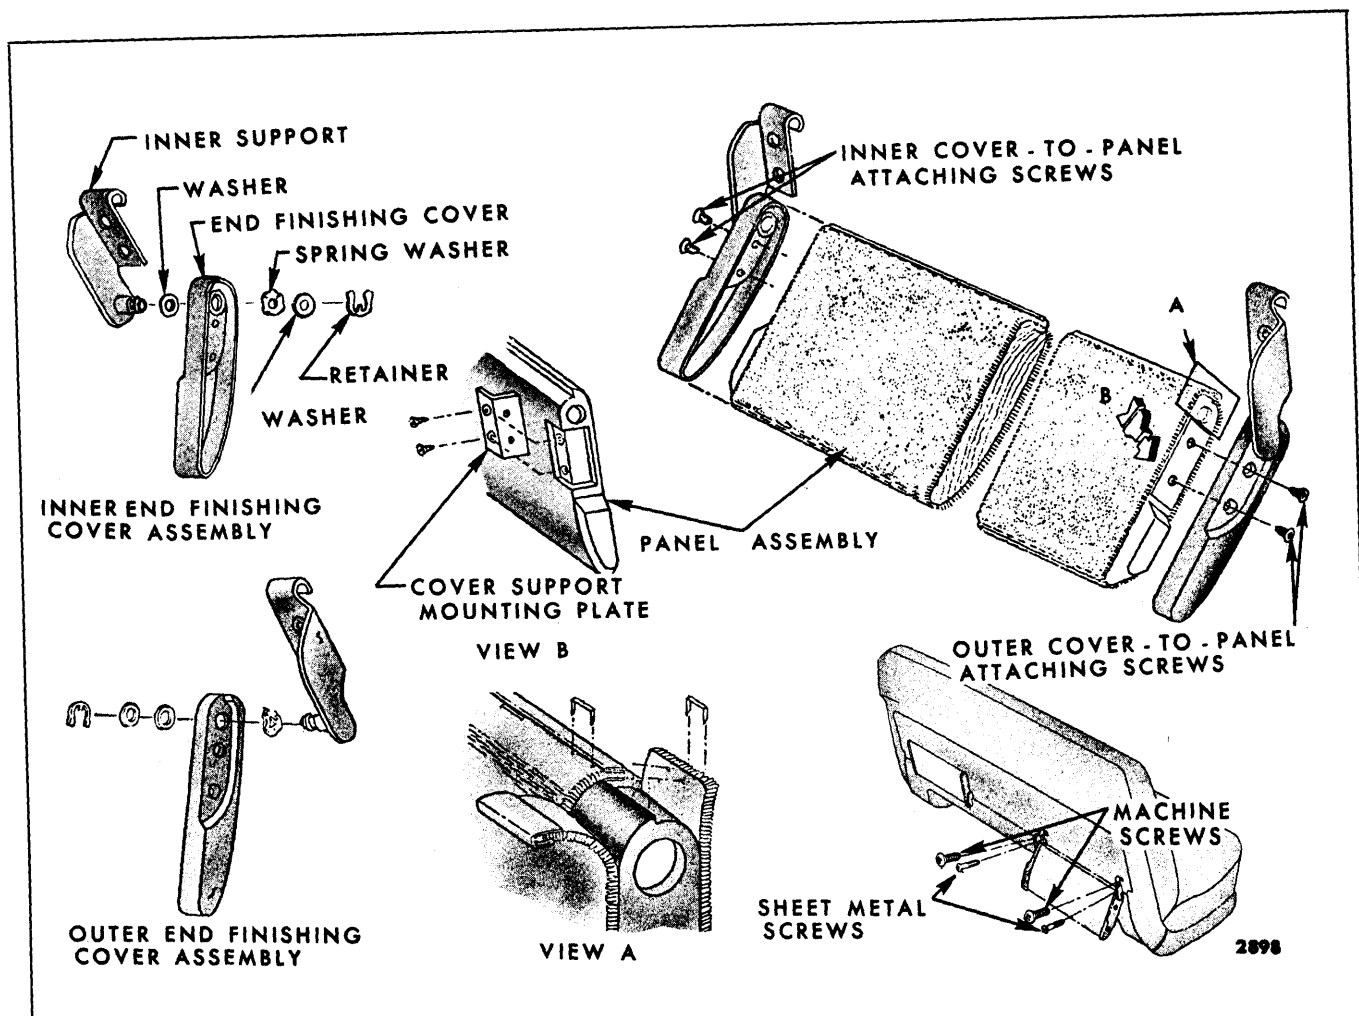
Foot Rest Assembly - Cadillac 68169 Styles
